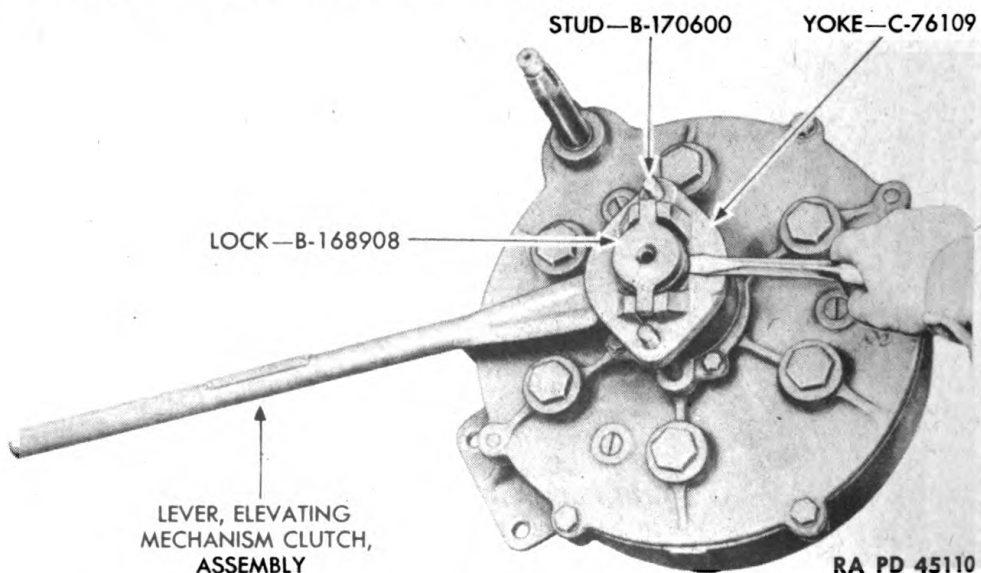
Removing Elevating Mechanism Clutch Lever Assembly
